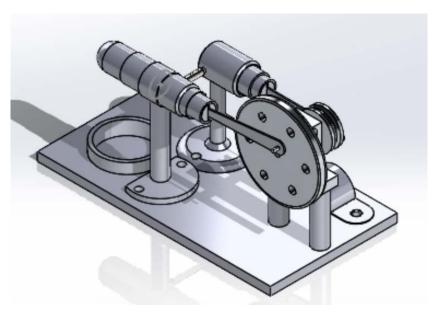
SolidWorks assembly of the Stirling engine kit.
